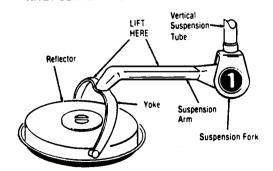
LIFTING SUSPENSION ARM ASSEMBLY.
